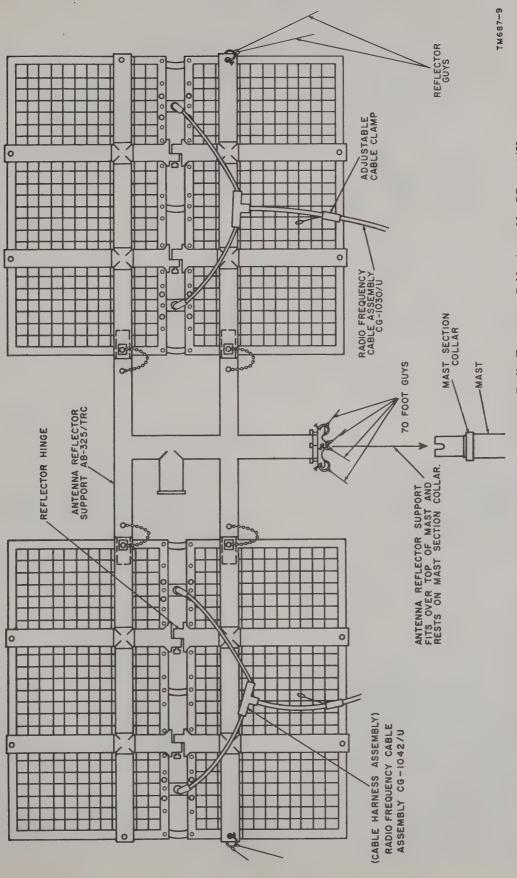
Rear view of reflectors showing cable harness, Radio Frequency Cable Assembly CG-1042/U.
